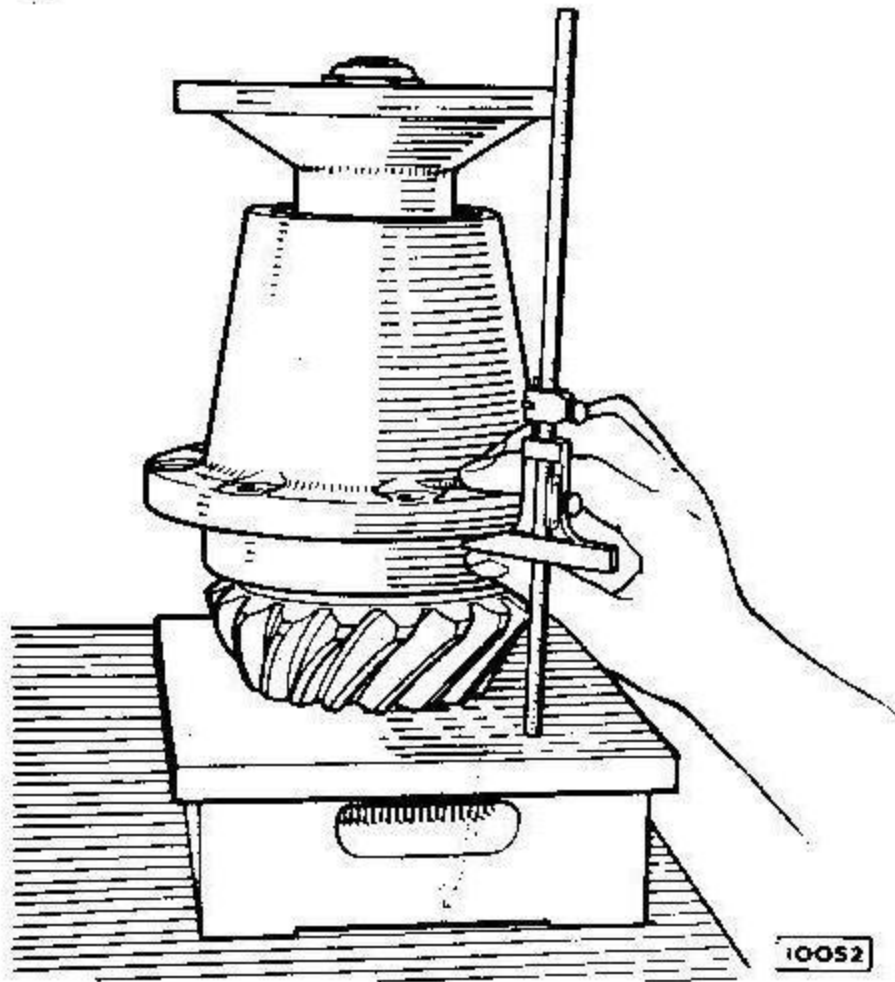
Checking the dimension from the nose piece mounting face to the back face of the bevel pinion
